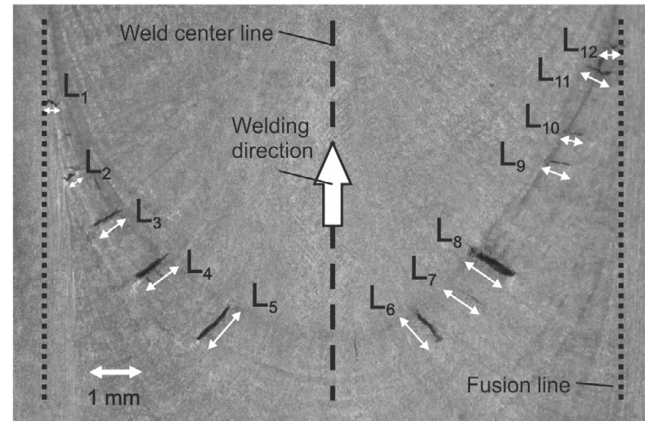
Solidification cracks and its lengths L_n in the weld metal on the surface of a specimen after MVT testing (top view), martensitic filler material, 4% bending strain, not all cracks are marked for reasons of clarity.
